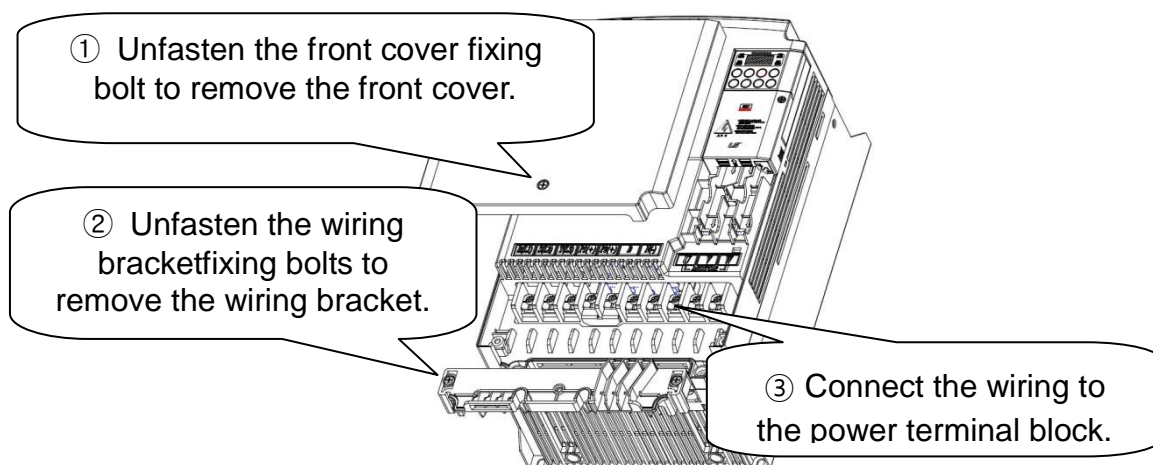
Removing the front cover and wiring bracket (15 kW 200 V - 22 kW 200/400 V)
